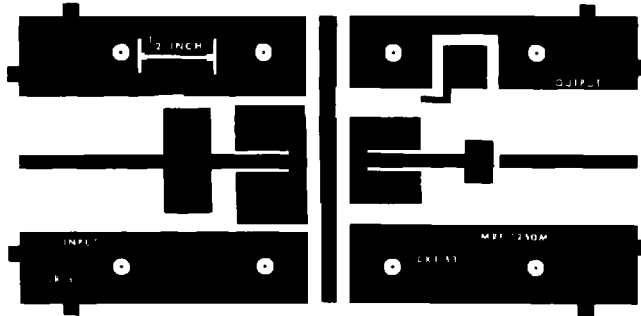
PRINTED CIRCUIT BOARD LAYOUT — 1090 MHz TEST CIRCUIT
